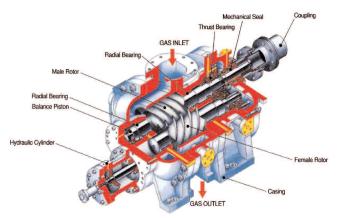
Typical Cutaway Drawing of Oil-Flooded Screw Compressor.
